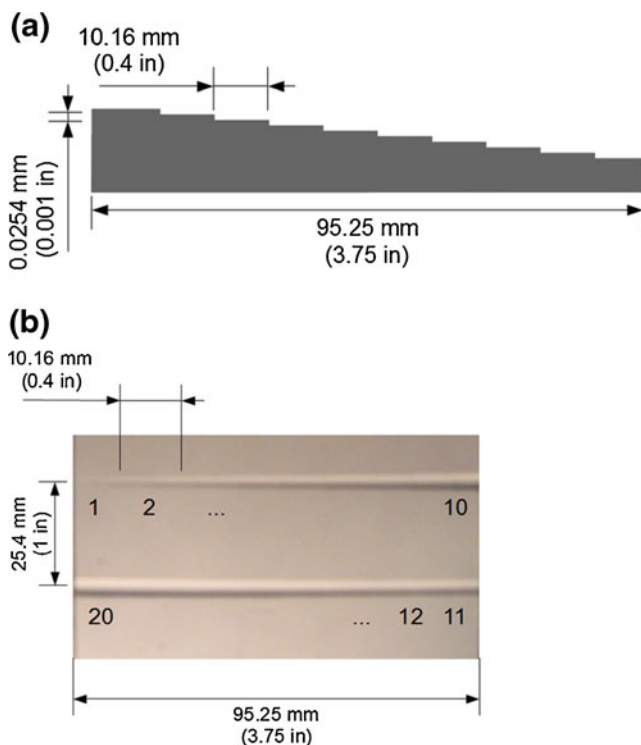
(a) Schematic of the milling steps taken for one notch of the machined aluminum plate and (b) image of the calibration plate
